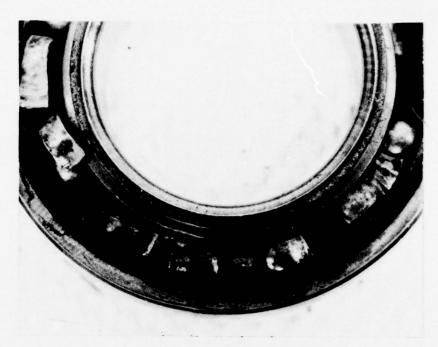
Bearing S/N TRL-15. 2.5x Enlarged View.
